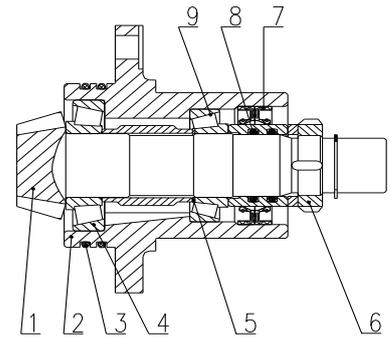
Adjustment of Central Transmission of Front Drive Axle
